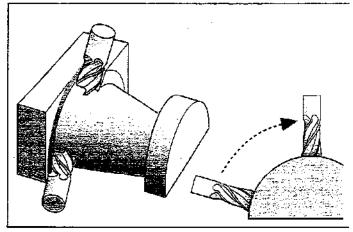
Example of simultaneous movement of more than three axes: machining a 3D surface with an end milli
